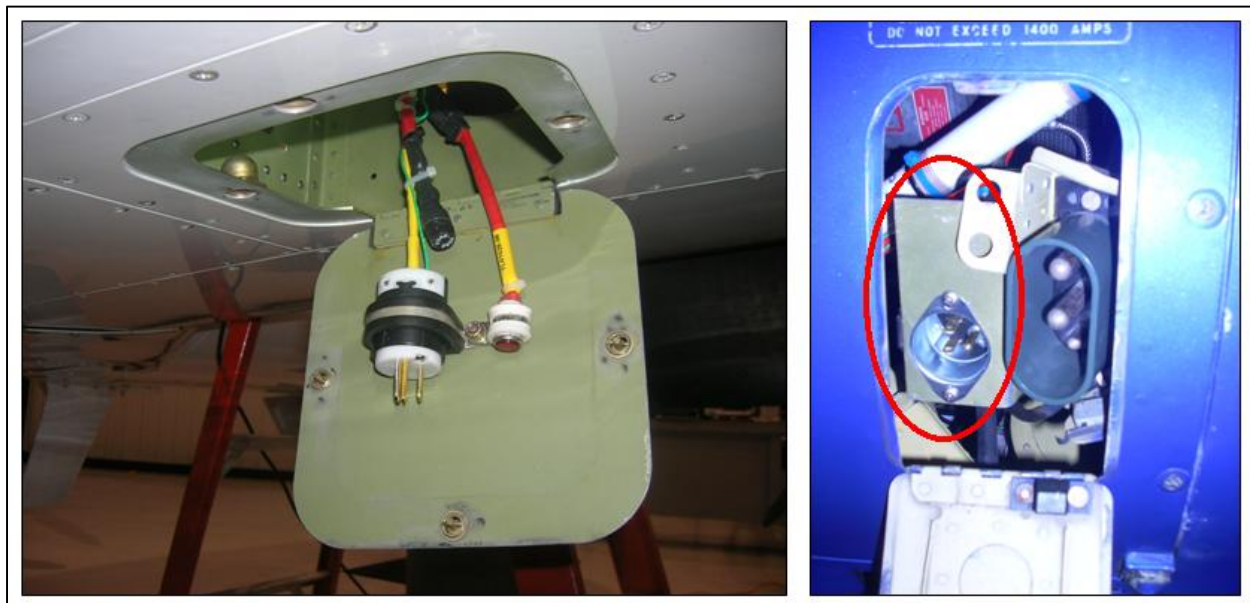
Examples of plug mounting options, plug with clamp, and flush plug mounted in bracket accessible through existing DC access.
